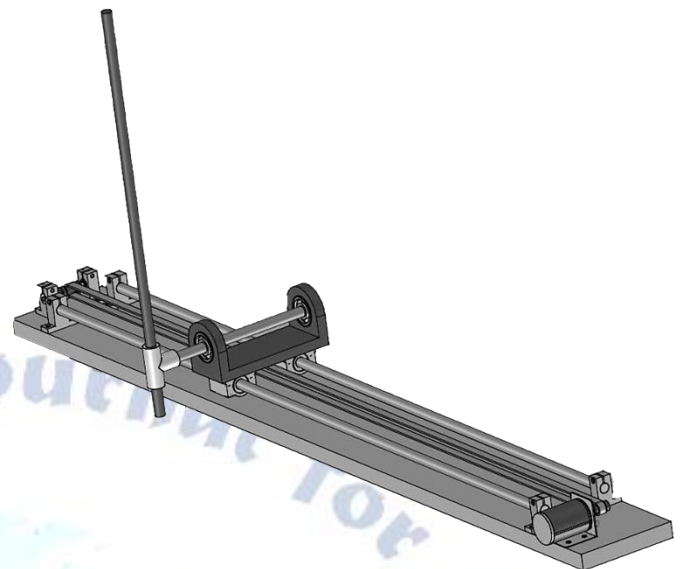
Assembly of Inverted pendulum control setup.
